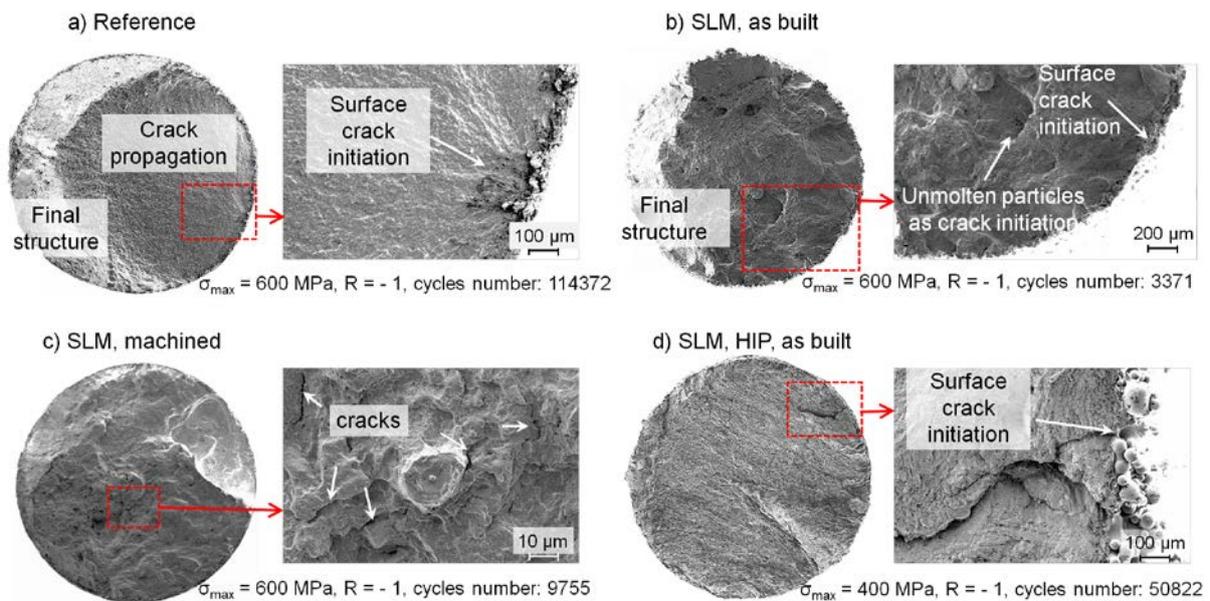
Typical fracture surfaces of 'Reference' (a), 'SLM, as built' (b), 'SLM, machined' (c) and 'as built' 'SLM, HIP'(d), samples by HCF tests.
